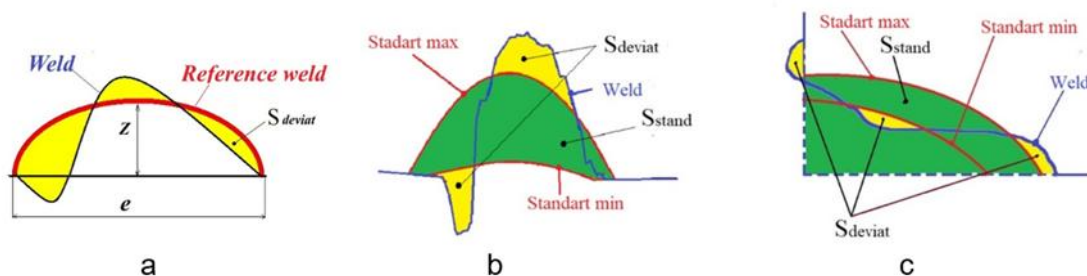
Scheme for comparing a digital weld shape replica with the reference by nominal values (a) and by tolerance range for butt (b) and fillet (c) welds.
